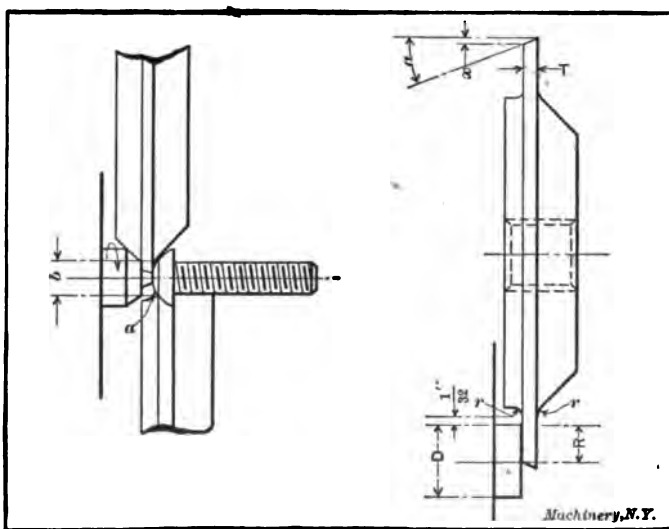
Spherical Screw Head formed by Combination of Forming and Cut-off Tools
